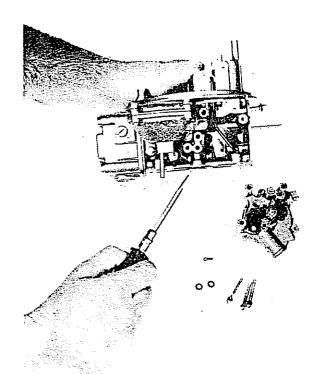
REMOVAL OR INSTALLATION OF INTERGAL AUTOMATIC CHOKE
